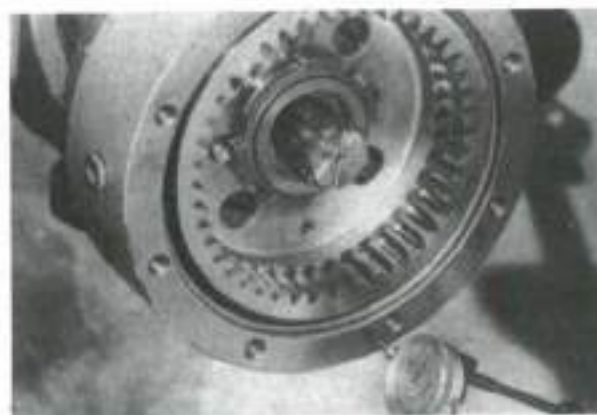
To set stub axle bearing preload, mount a dial indicator so probe contacts face of wheel hub. Measure end play and refer to text.
